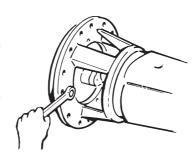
Bearing Assemblies 5F and 6F Casing cover and lantern are secured together by two screws.
